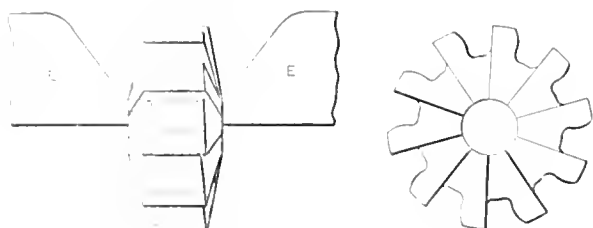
Enlarged View showing Cutter and Ends of Spindles upon which it revolves.
